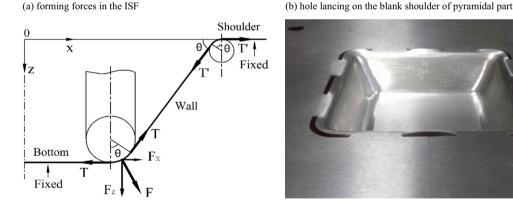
Forming forces in the ISF and hole lancing on the blank shoulder of pyramidal part.
